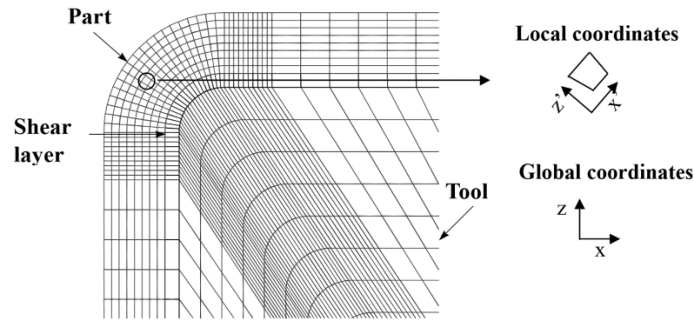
Finite element mesh showing corner geometry of part, shear layer, tool, local and global coordinates. [43]
